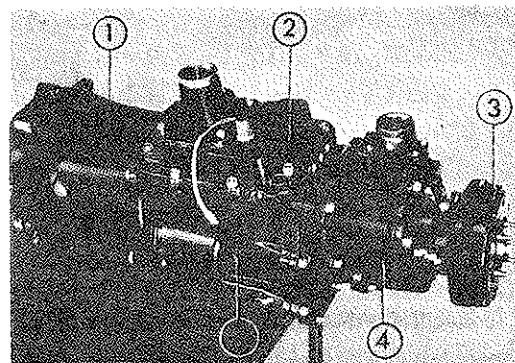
Disassembly Sequence of Transmission and Transfer
